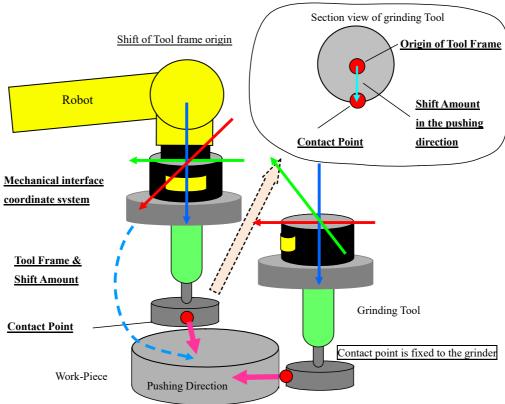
(f) Example 2 of setting TOOL to "3-Axis FS ContactP. Position"
